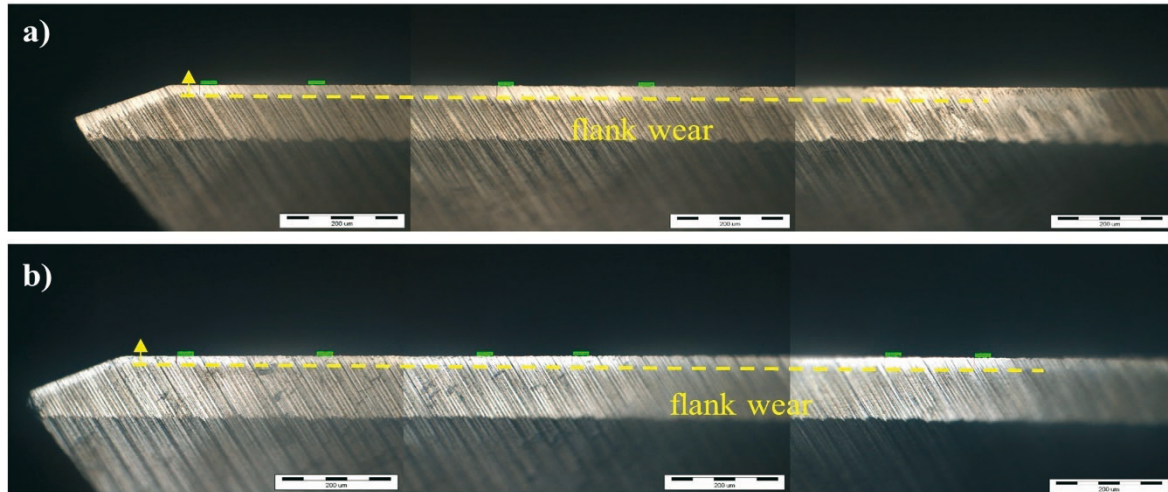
Condition of the flank face (a) feed per tooth = $0.04\ \text{mm/tooth}$ (b) feed per tooth = $0.08\ \text{mm/tooth}$
